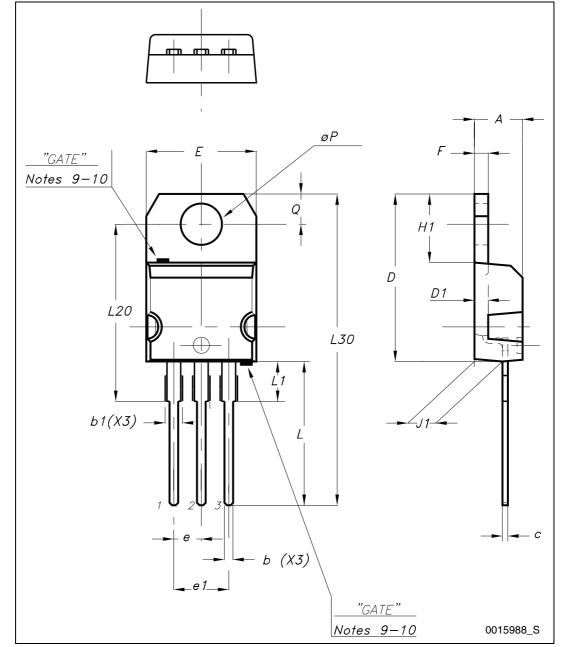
TO-220 (type STD-ST Dual Gauge) package dimensions
